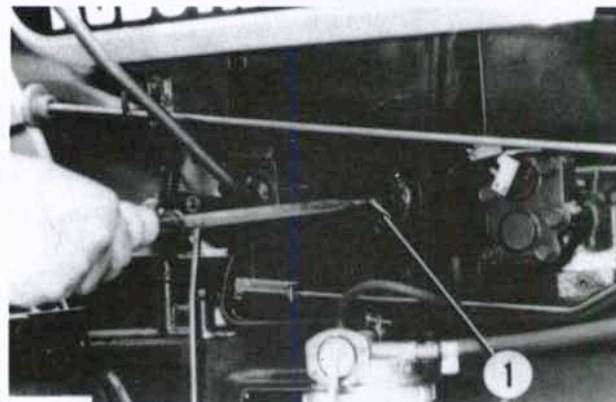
Turn steering gear adjusting screw (1) to adjust steering wheel free play.
